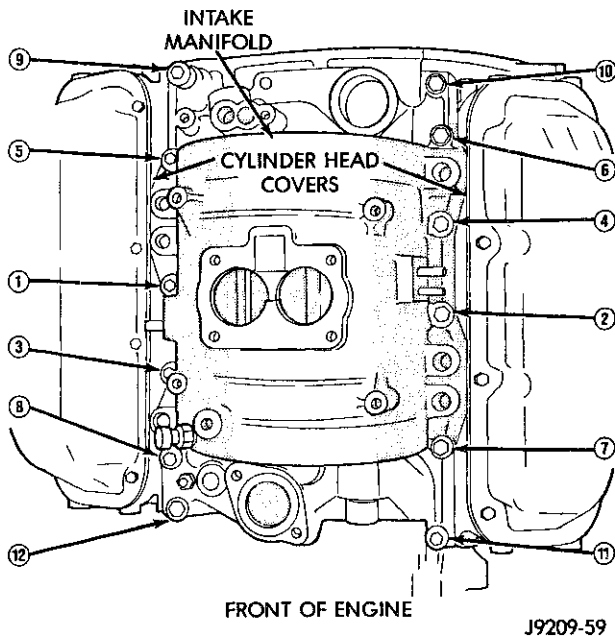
Intake Manifold Bolt Tightening Sequence—V-6
